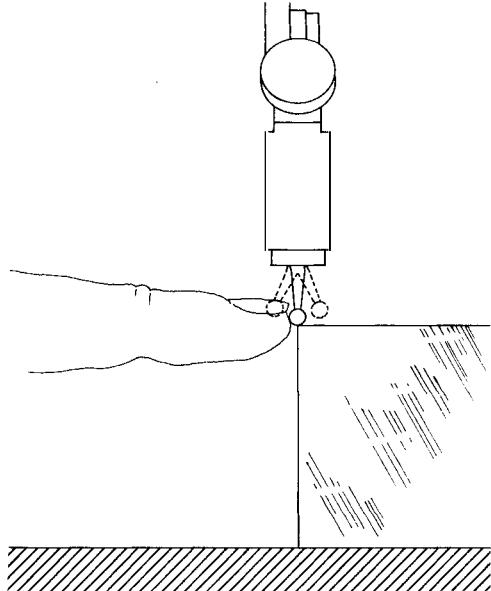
The indicator probe is adjusted at right angle to its measuring direction through a clutch arrangement until by eye assessment the probe-tip appears to have no run-out. The edge of the block is a convenient visual reference to which the probe-tip may be compared when swung through 180°.
